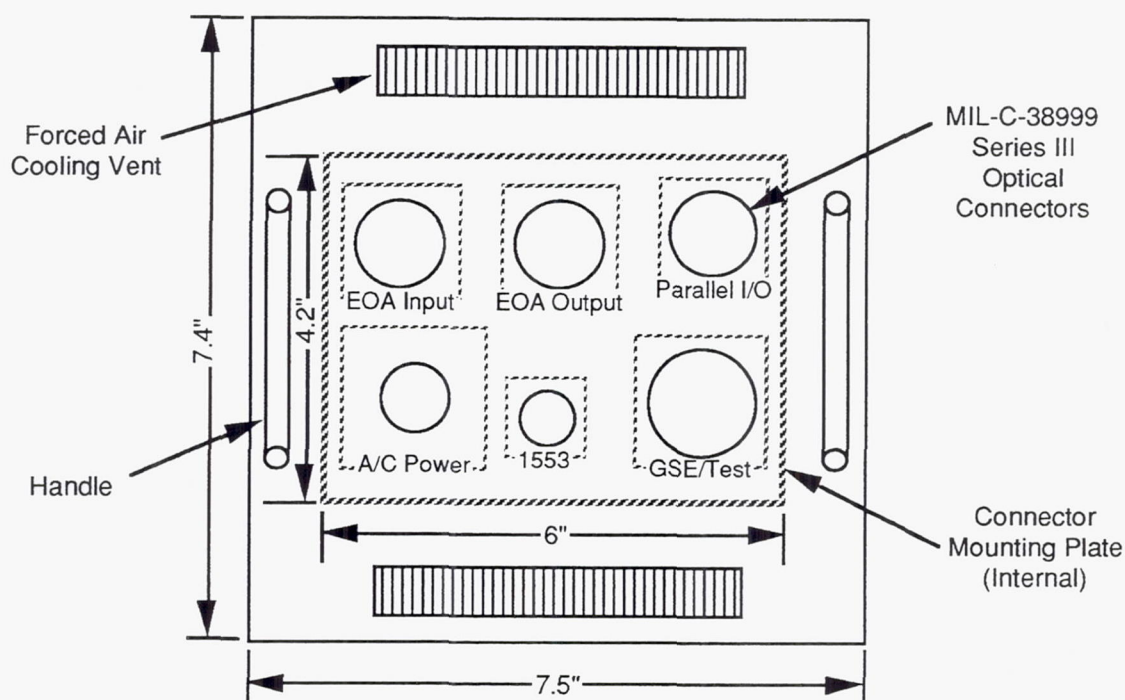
EOA Mechanical Chassis Front Panel Layout
